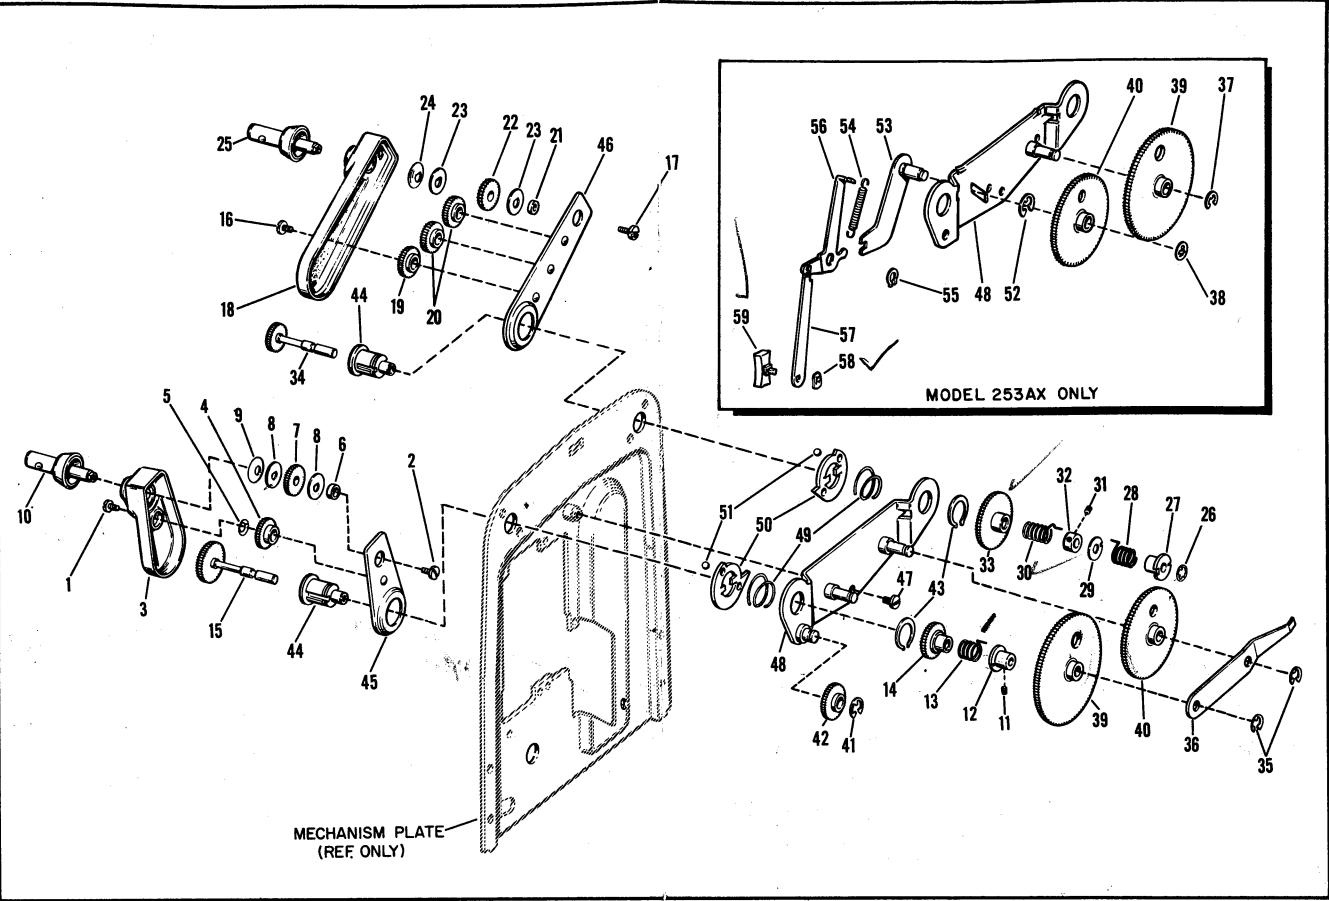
Reel Arms and Gears (Models 253AX, 253BRX and 253RX)
